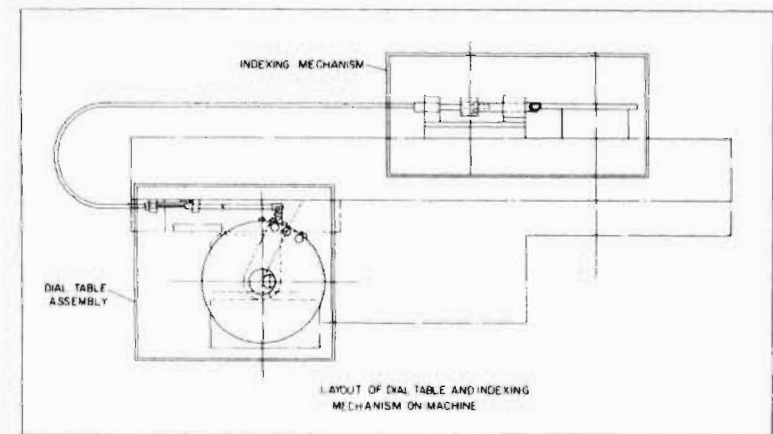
Thread-rolling machine works on the principle of the automobile choke rod, with the dial-feed mechanism moved by the indexing device.
